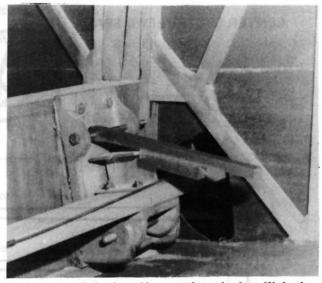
Left fuselage skin cutout for spring bar. Wedge installation.
